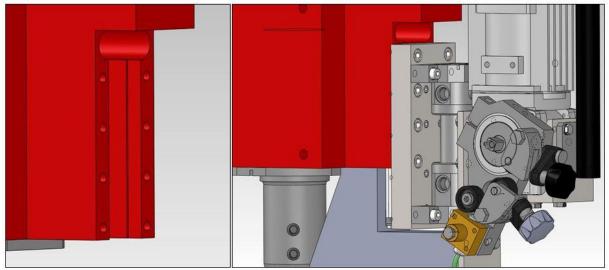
The picture to the left shows the mounting interface on the lab machine. The picture to the right shows how the whole concept is mounted to the lab machine via the mounting plate
